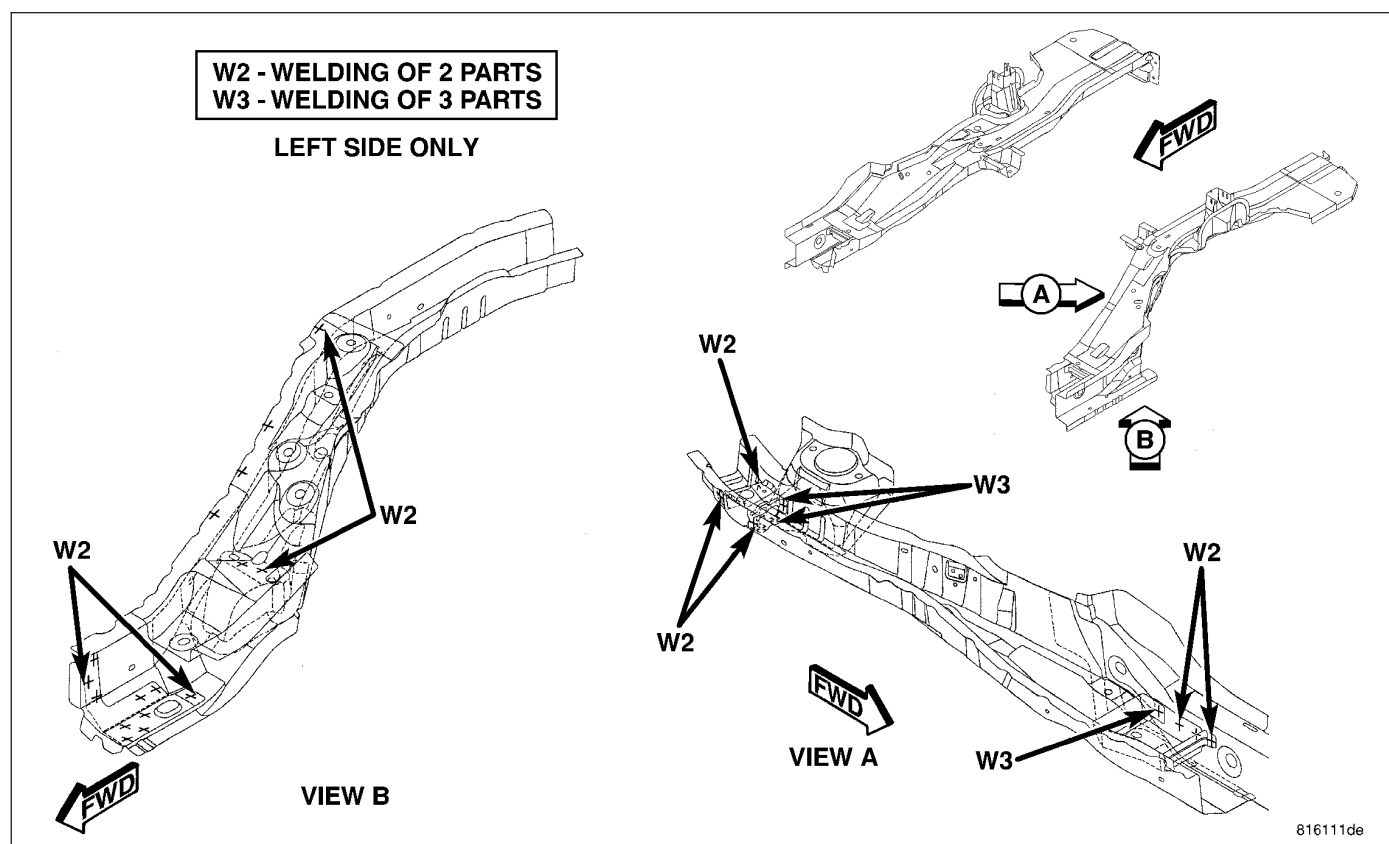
SIDEMEMBER ASSEMBLY (13 OF 17)
